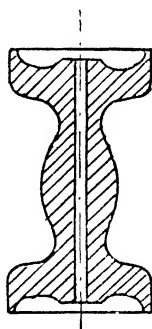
Special wooden holder for cooling down and transporting solder dops; the device can be used from both sides
